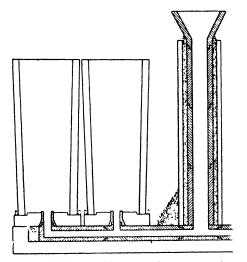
False mould bottom plate on a bottom-pouring arrangement. (From "Practical Steelmaking", by W. Lister, by courtesy of the author.)
